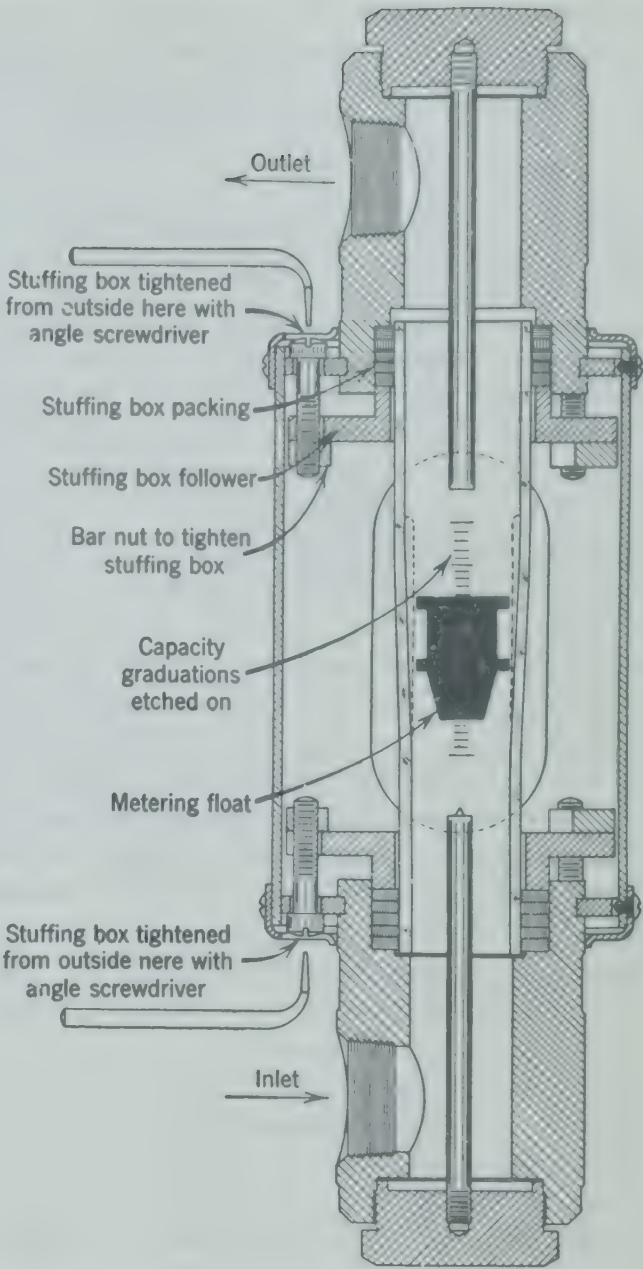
Sectional drawing showing construction of rotameter. (Fischer and Porter Co.)
